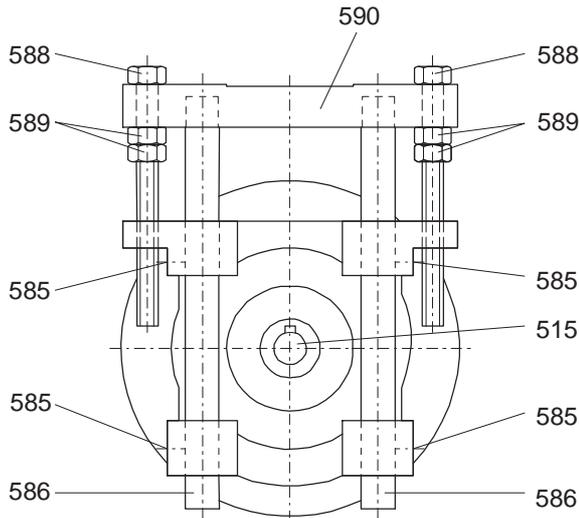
Mounting motor bedplate IEC motors sizes 132 to 200
